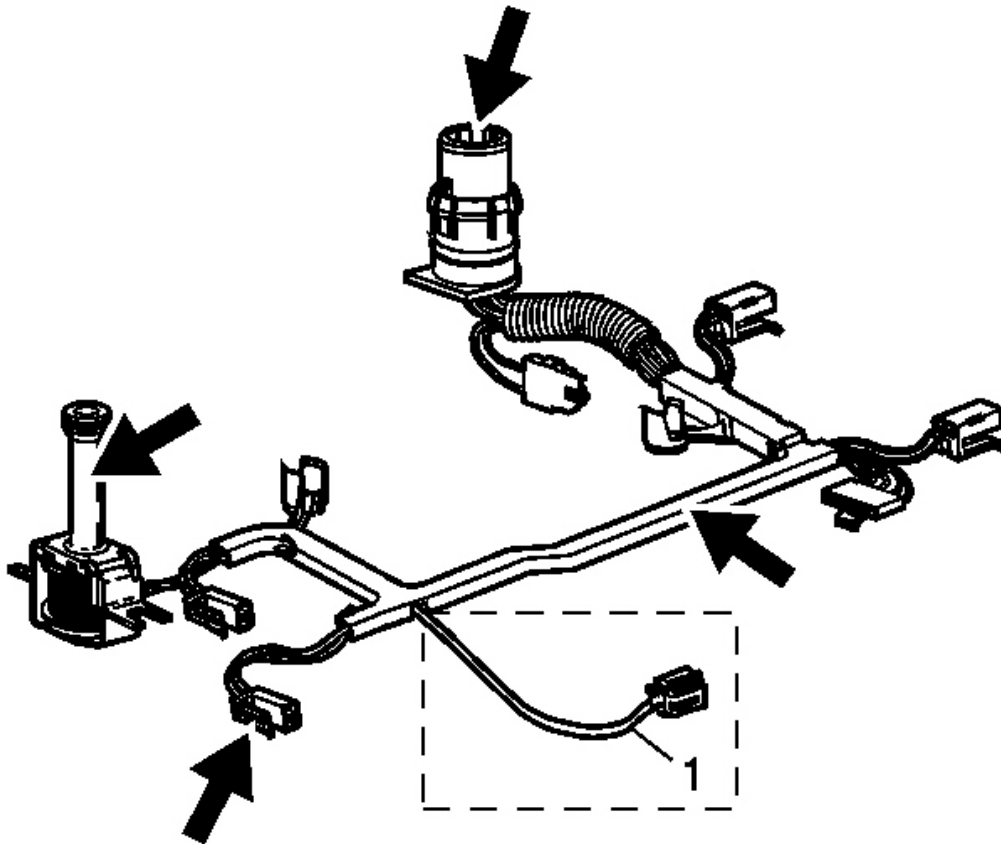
Locating Wiring Harness And Solenoid Assembly Inspection Areas
